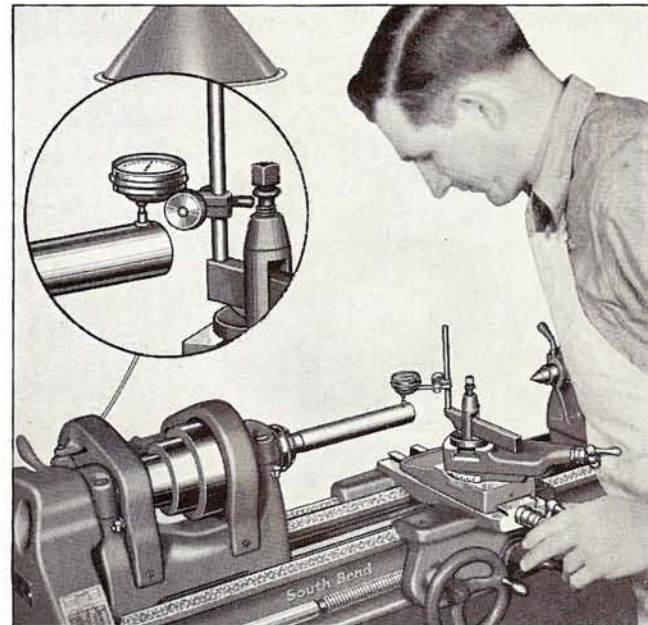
Testing Alignment of Headstock Spindle with V-ways of Lathe Bed.
